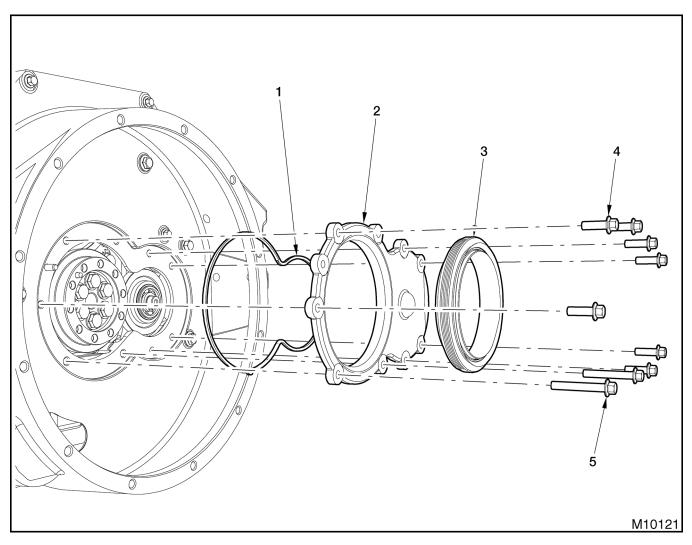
Crankshaft rear oil seal and crankshaft rear oil seal carrier
